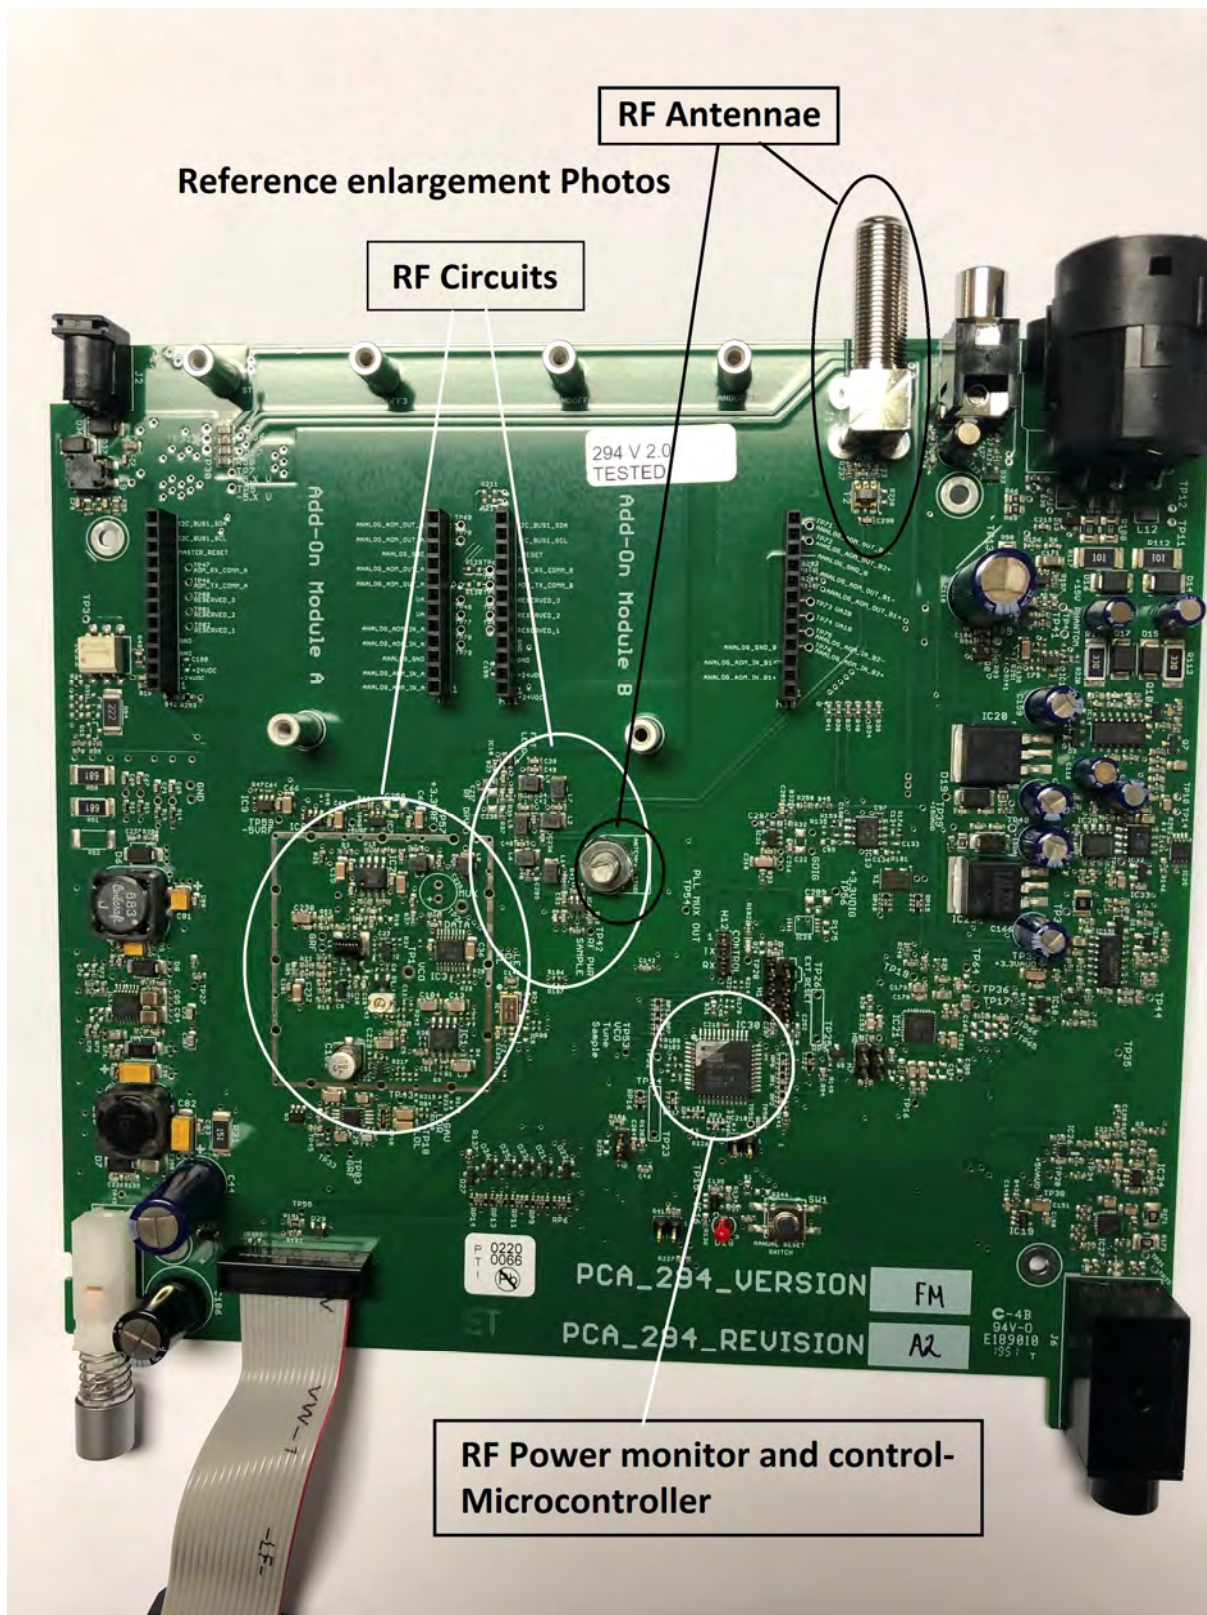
PCA 294 board removed from chassis, and shield cover removed from RF radio section.
